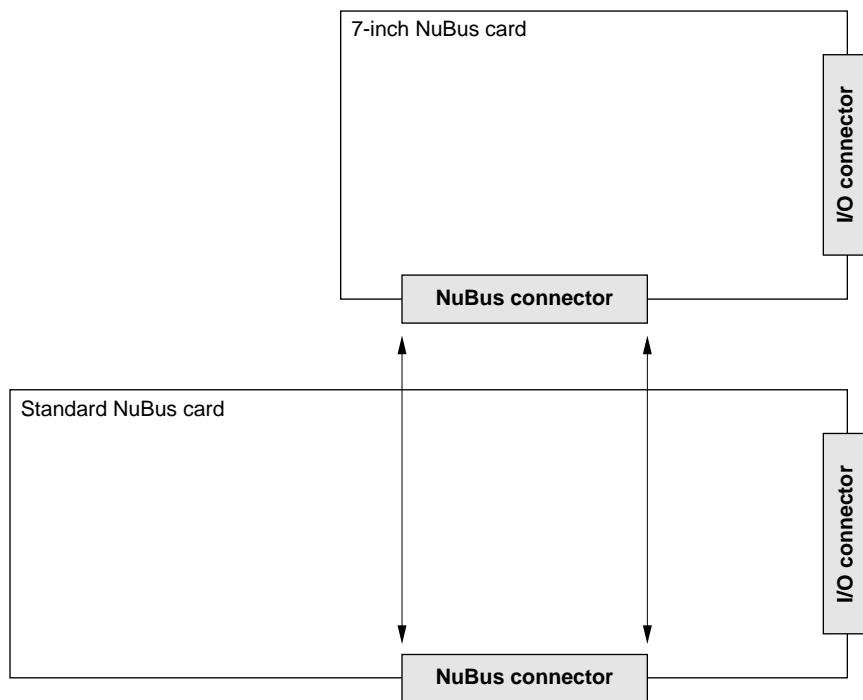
Dimensions of the 7-inch NuBus expansion card
